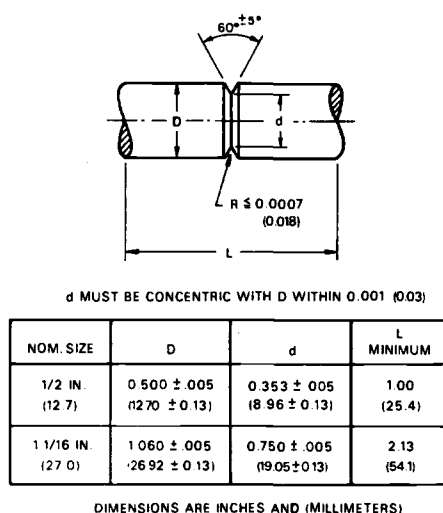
Test sections for the notched cylindrical specimen (ASTM Method E 602-76T).
